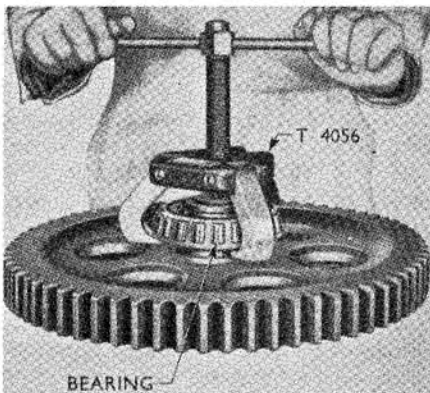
Removing axle shaft inner bearing from hub of bull gear.
